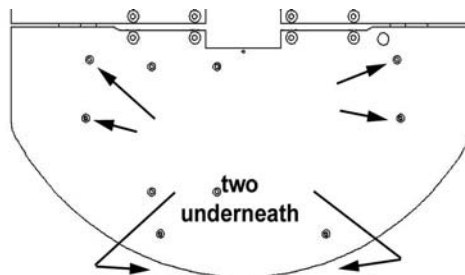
Remove indicated screws to access the front plate of Pioneer 3-DX and -AT robots.
